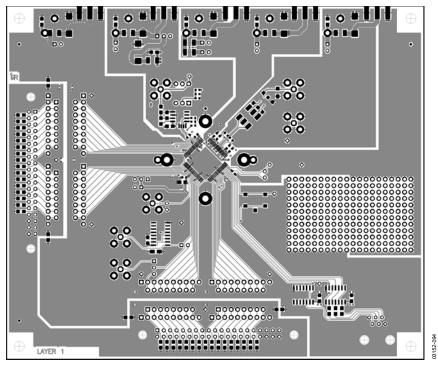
PCB Assembly, Layer 1 Metal, Rev F Evaluation Board
